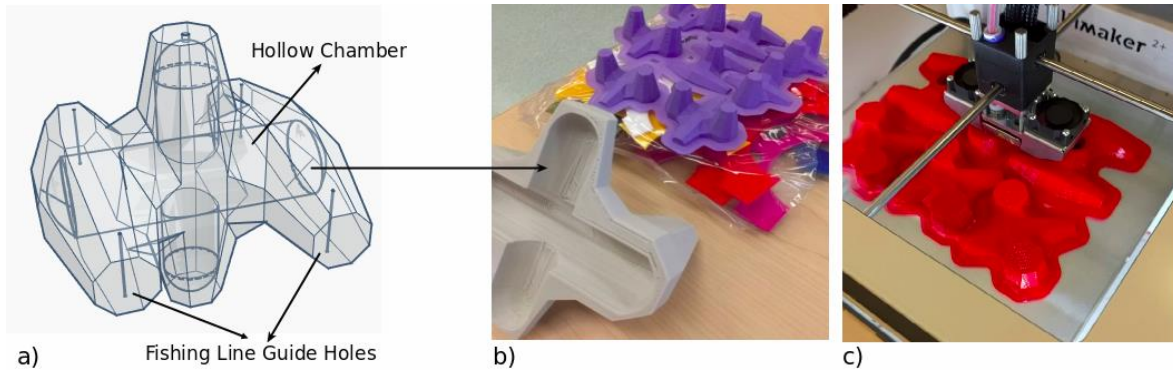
Scaled 3D printed Core-Loc Unit. (a) Tinkercad design; (b) Hollow chamber; (c) Ultimaker 2+ printing
